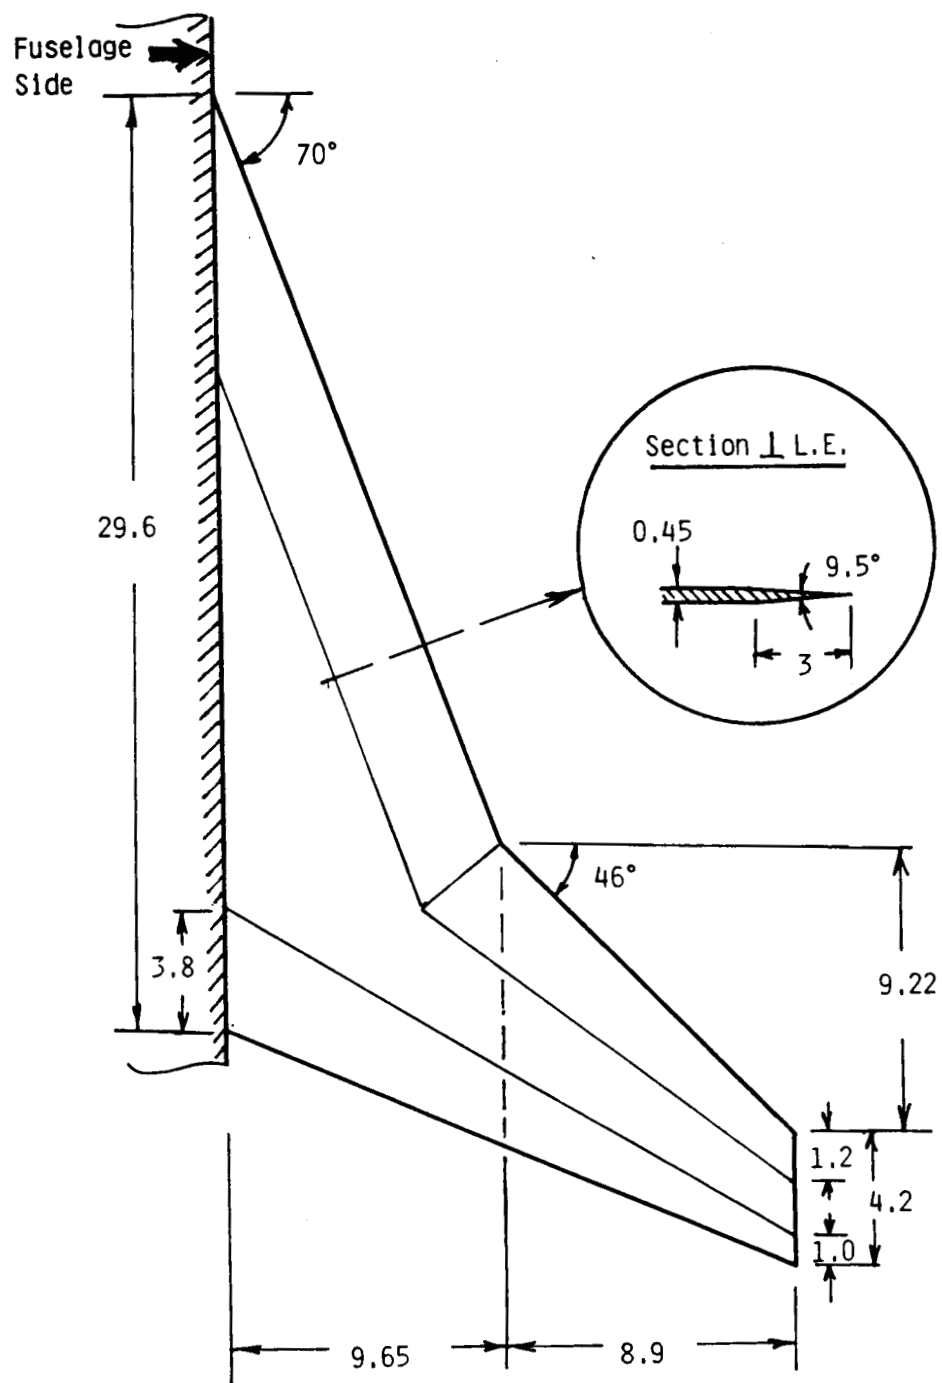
Cranked Wing Exposed Panel Geometry and Major Dimensions (in inches).
